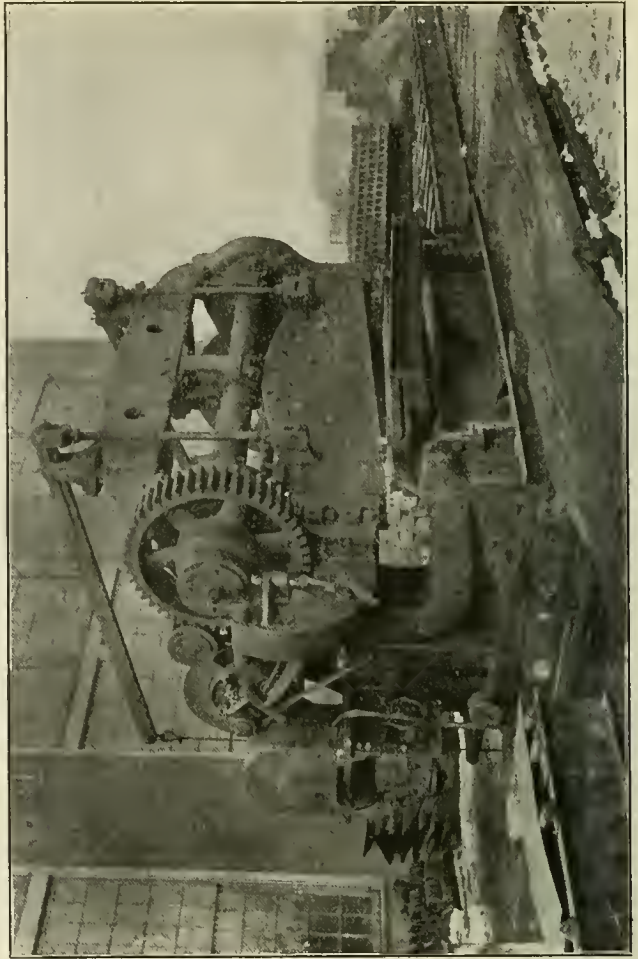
125-INCH GATE SHEAR FOR CUTTING LARGE SHEETS.
